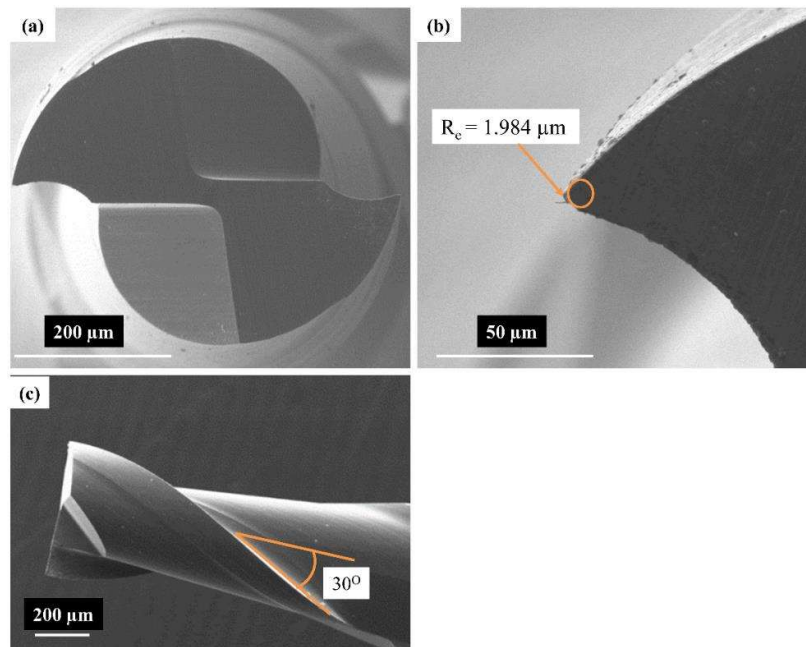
SEM images of fresh TiAlN coated WC micro end-mill (a) bottom view, (b) cutting edge radius, (c) side view
